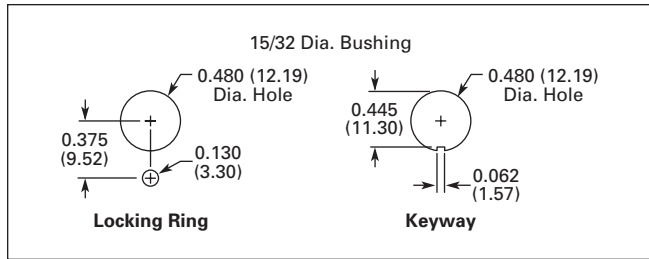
Toggle Switch Panel Cutout Dimensions in Inches (mm)
